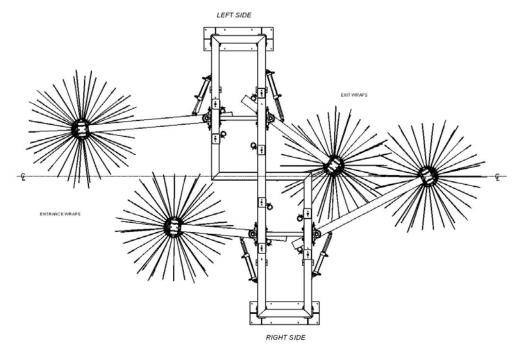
Dual Pack Flex Wrap in Extended Position
